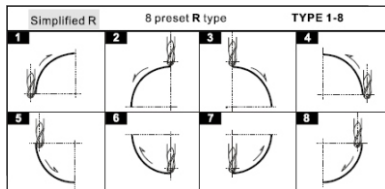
Using a arc lot TOOL for XZ/YZ plane Arc
